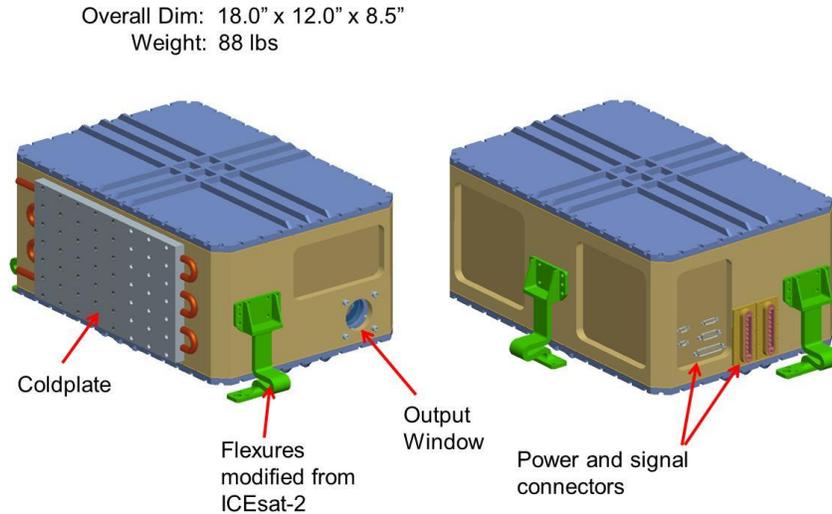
Dimensions, weights and interfaces of the UVLD laser optics module
